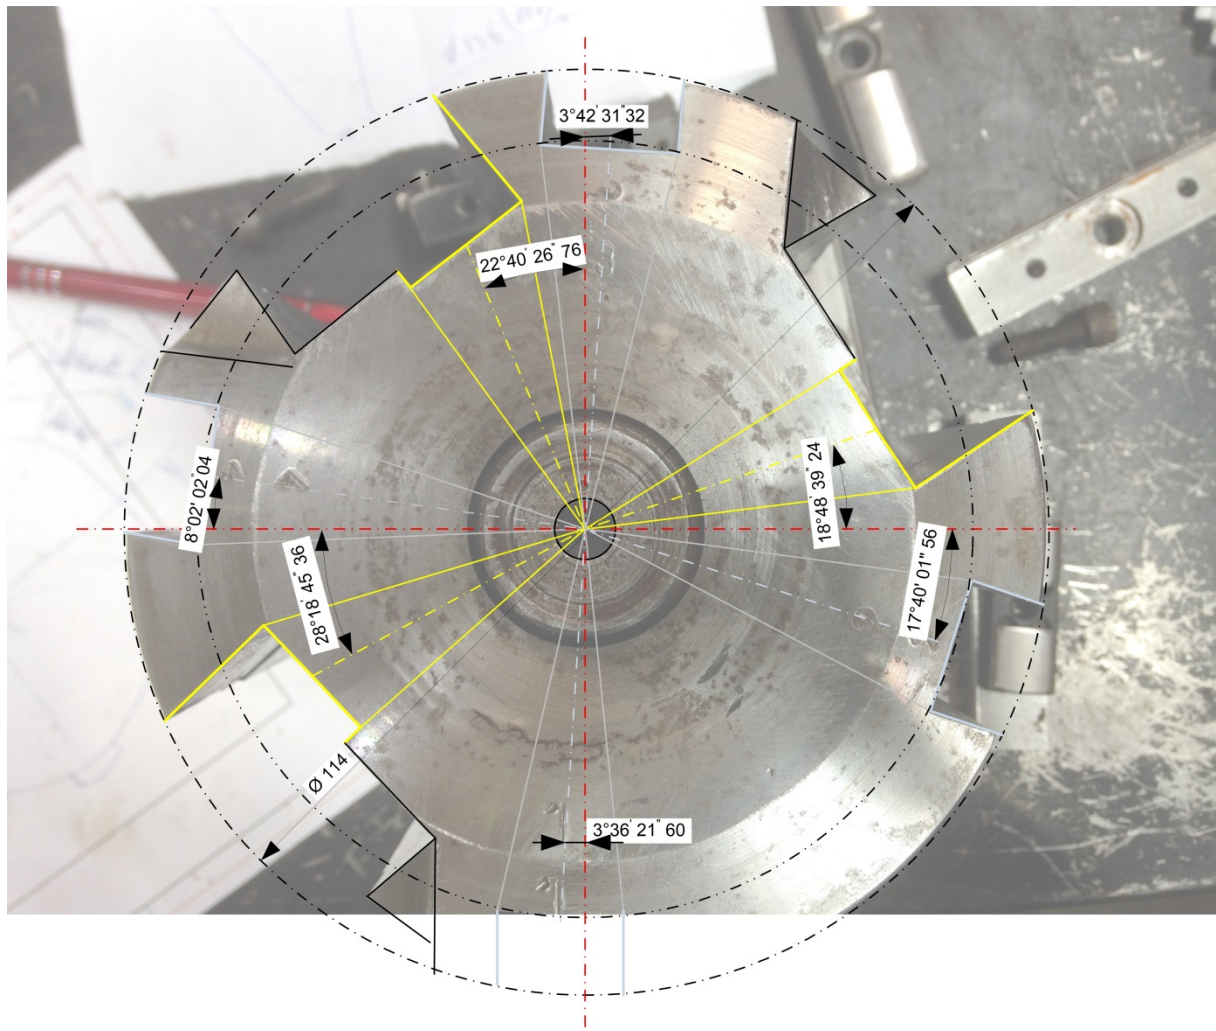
Determining of the angular position of the grooves for mounting the cutting inserts and guide plates:
